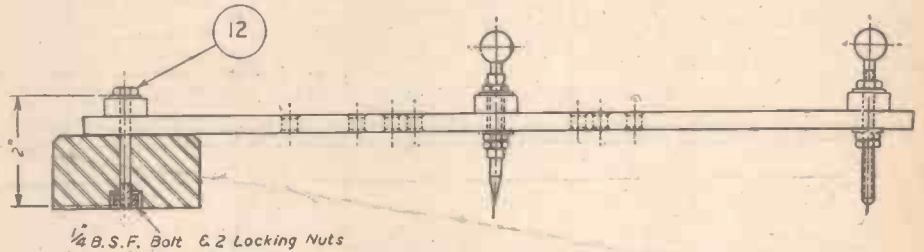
Part sectional end elevation showing detail of steadying weight and arm 1.
